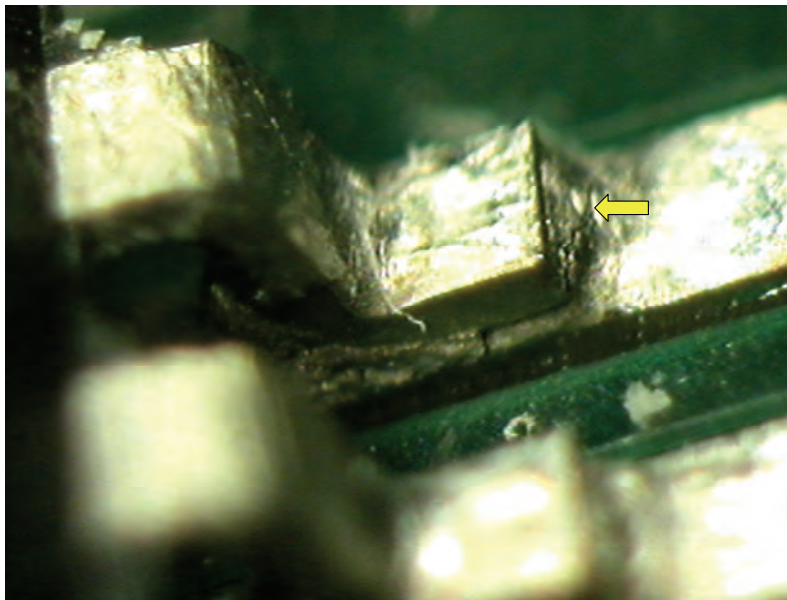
TSOP U61 Cracked Solder Joint (SnPb/SnPb)
